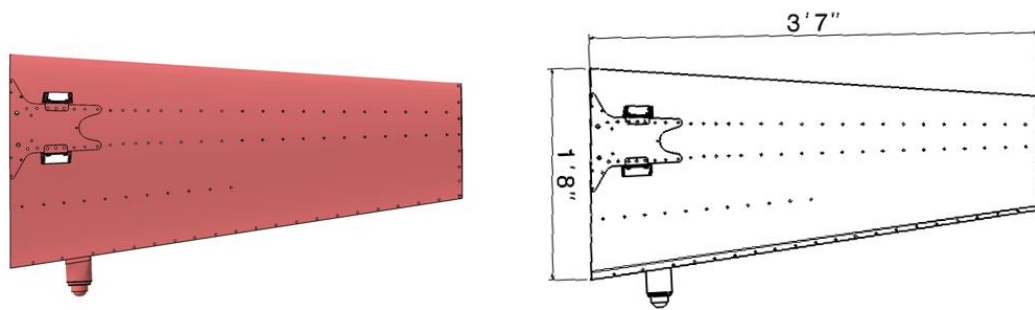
Part 27 Rotorcraft horizontal stabilizer CAD model overall dimensions.
